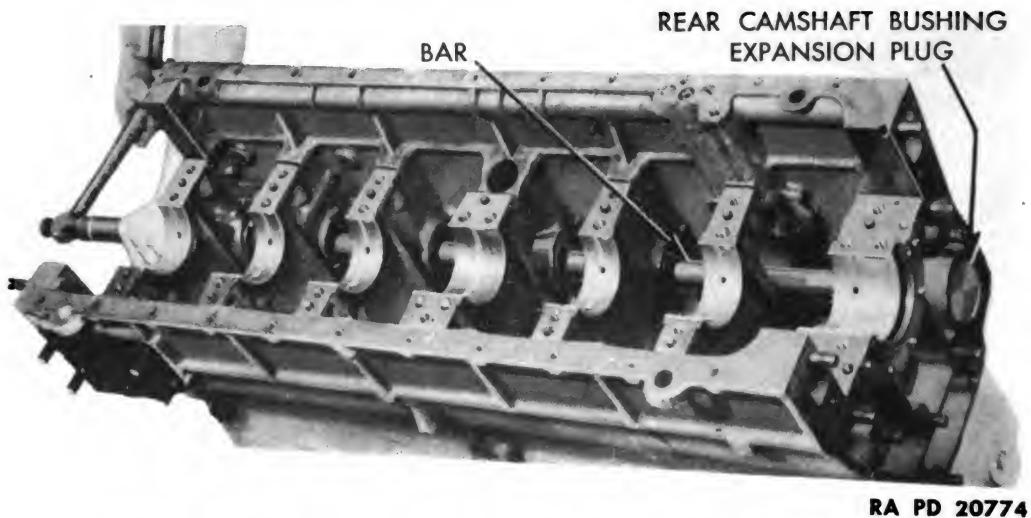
Removing Rear Camshaft Bushing Expansion Plug
